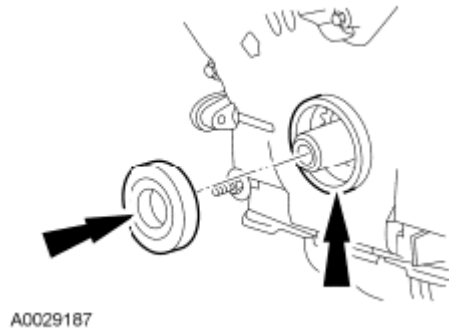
Locating Crankshaft Seal And Crankshaft Seal Inner Lip
